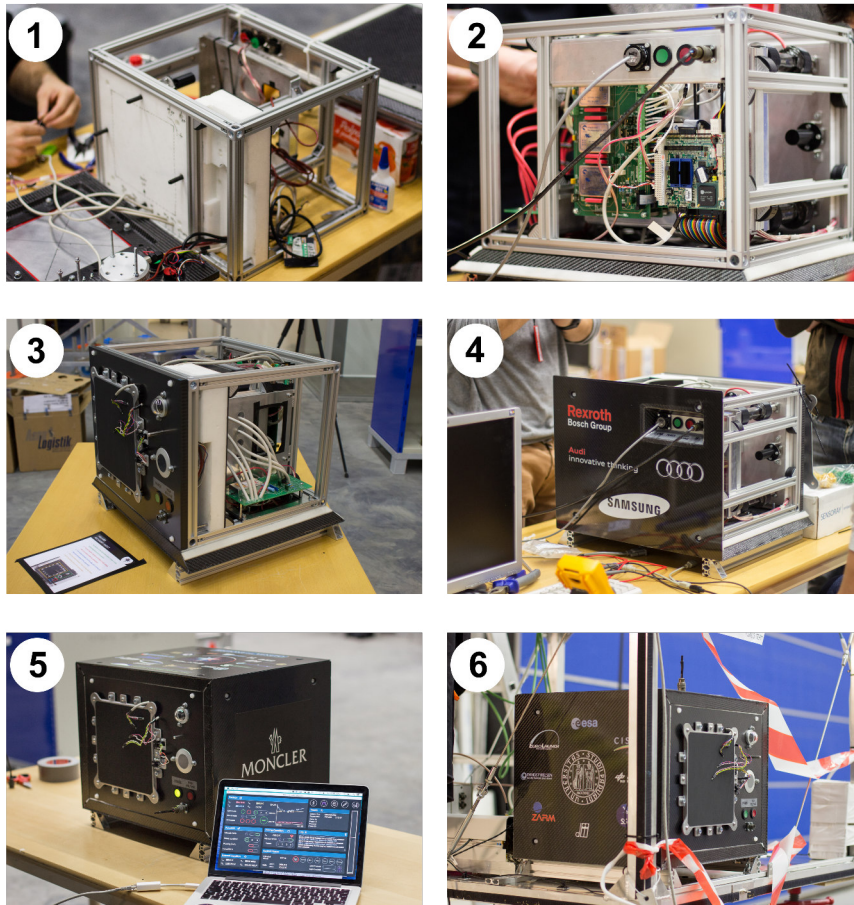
Experiments assembly. Mounting of the front face panel [1], mounting of the electronics shelf, of the PCBs and of the SBC and data acquisition boards [2], mounting of the high voltage PCB and of the actuation system [3], testing of the experiment through the rear connection panel [4], POLARIS experiment assembled [5], POLARIS experiment mounted on the *BEXUS18* gondola [6].
